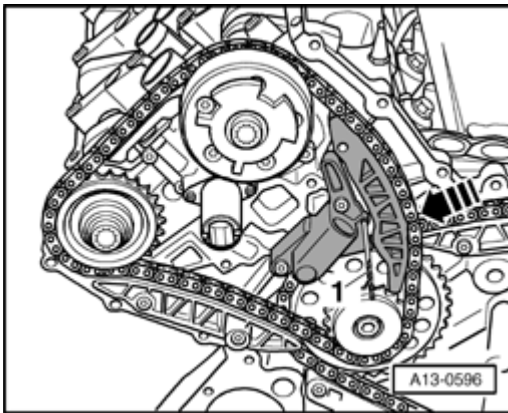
Pushing Glide Track Of Chain Tensioner For Left Timing Chain
